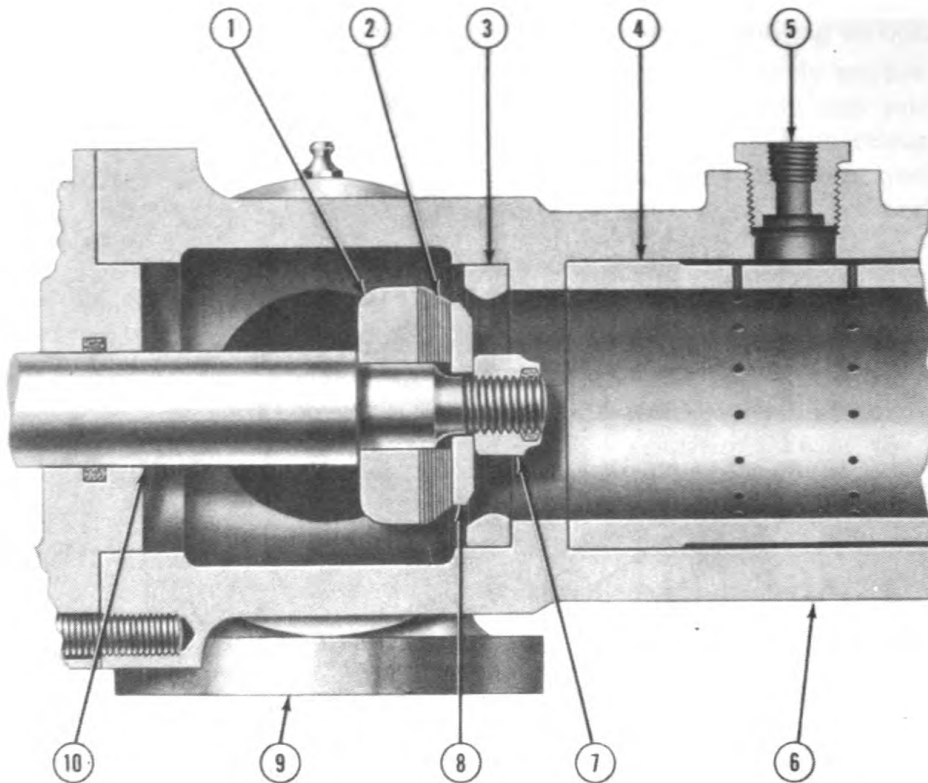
Main gun valve and vertical trunnion or gun body (sectional view).
